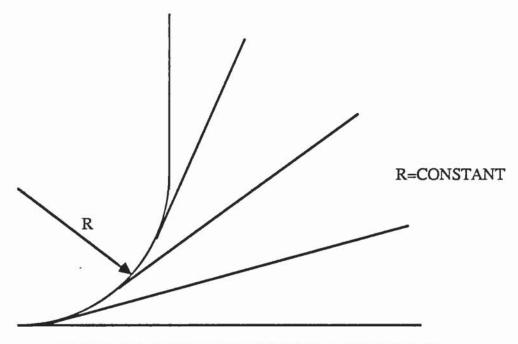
CONSTANT INSIDE RADIUS METHOD OF FORMING BENDS
